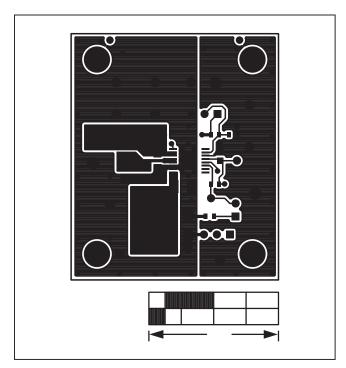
MAX16904 EV Kit PCB Layout—Component Side
